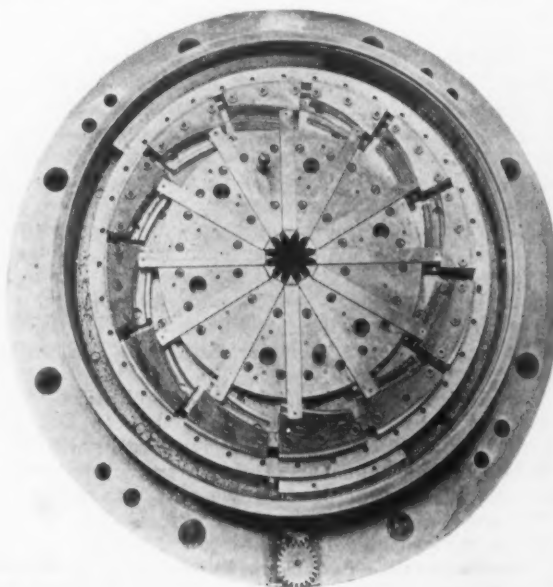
Tool Head Partly Disassembled with Principal Parts of Mechanism Exposed
